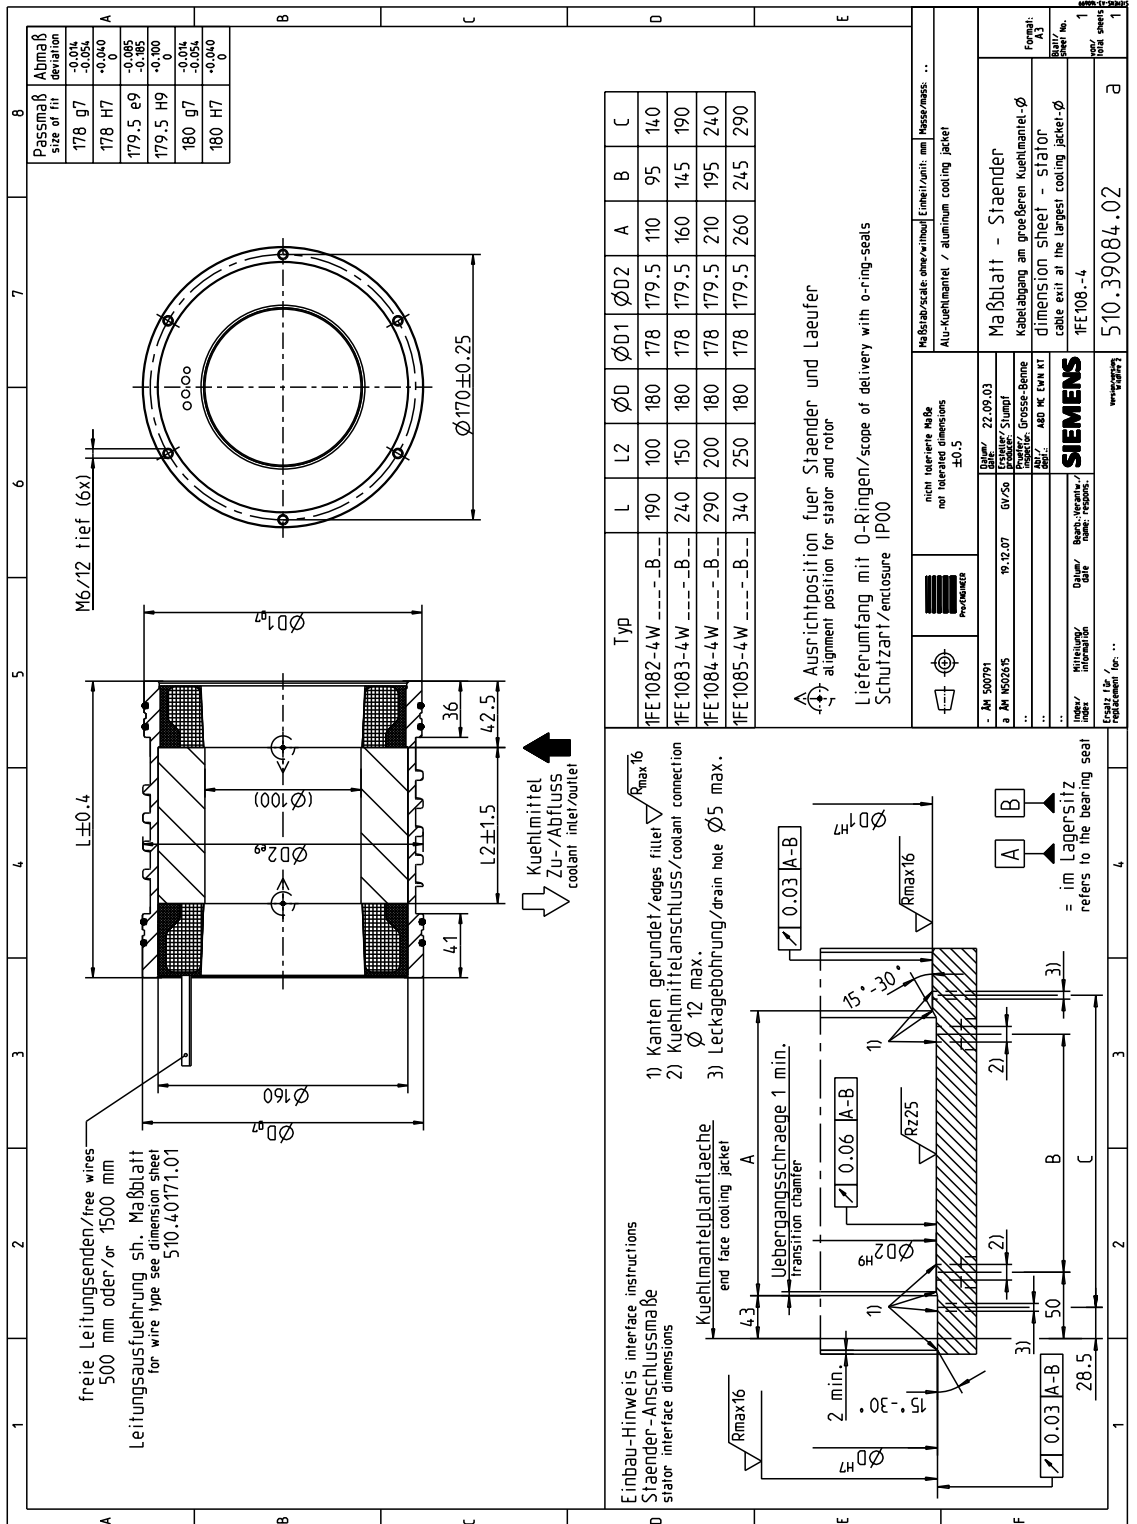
1FE108□-4, stator with cooling jacket, cable outlet at the larger cooling jacket diameter
